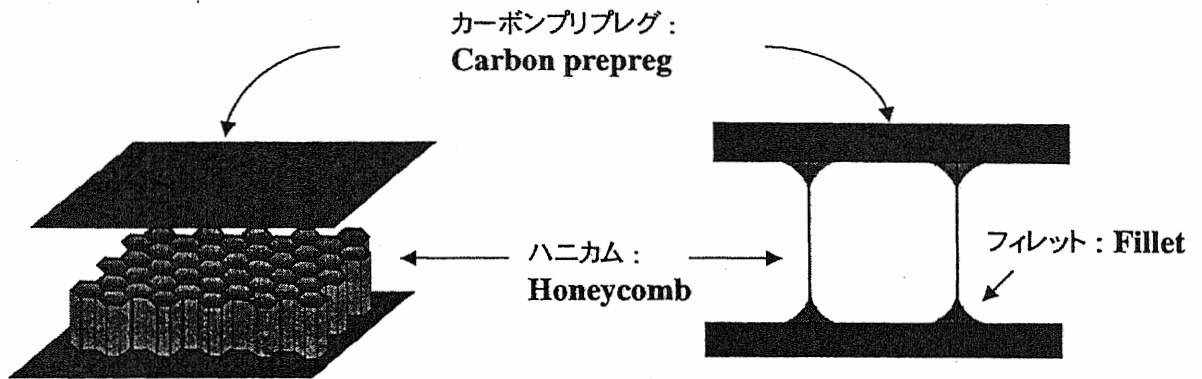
Bag lay-up manufacturing of honeycomb core sandwich panel
